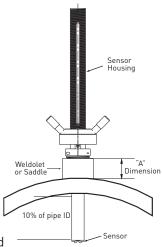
Hot-Tap installation with "A" dimension using a ball valve, short nipple and weldolet (threadolet)
